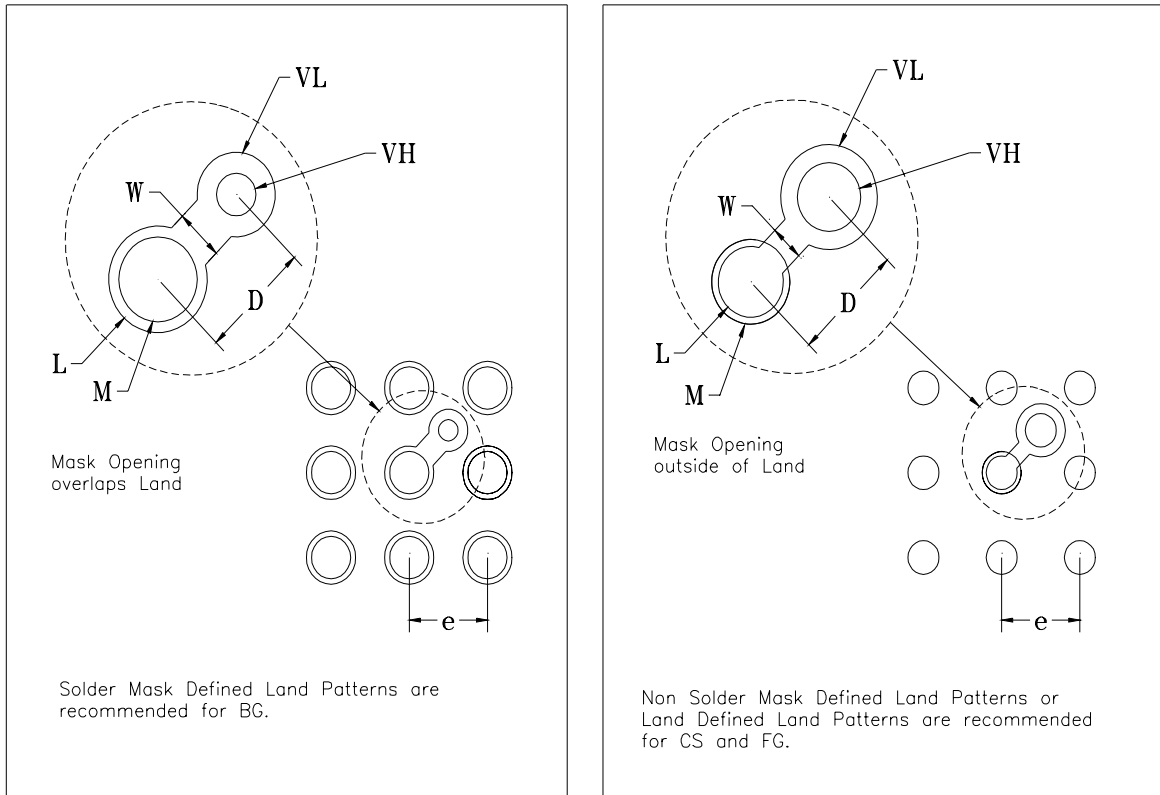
Suggested Board Layout of Soldered Pads for BGA, CS and FG Packages
